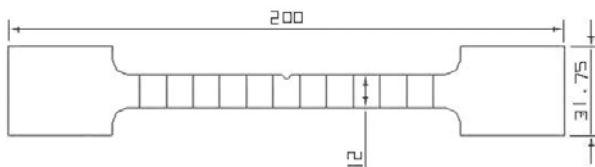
Geometry of the specimen. All the dimensions are in millimeters.
